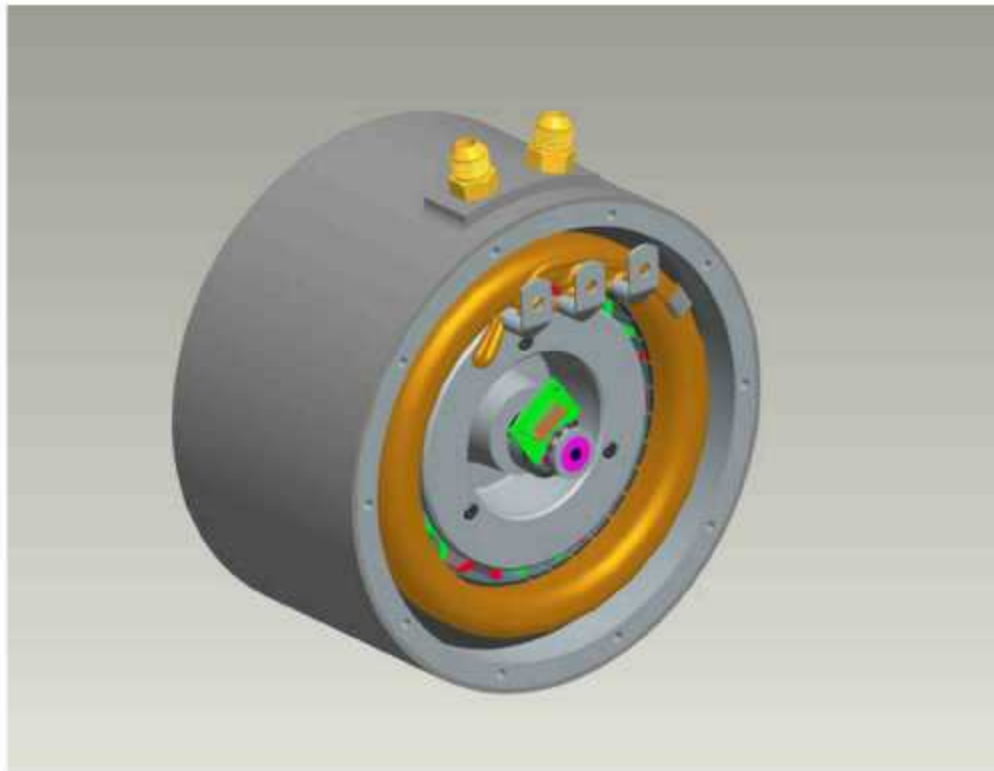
Conceptual motor assembly supplied to transmission MFG.
